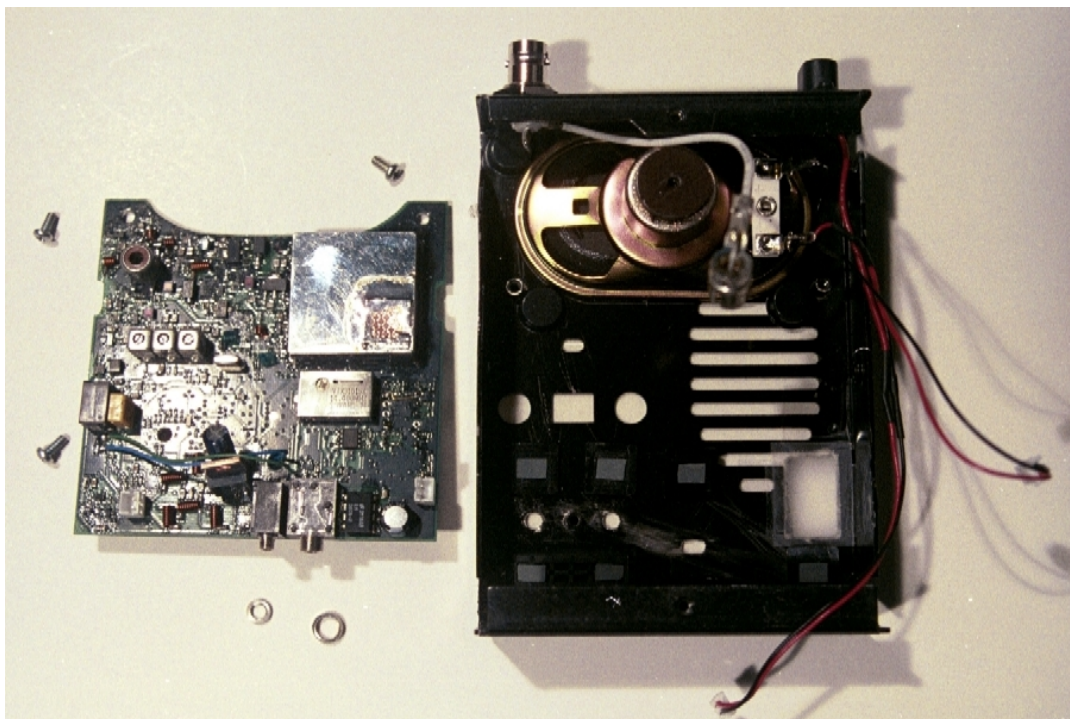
D complete bottom side PCB assembly
